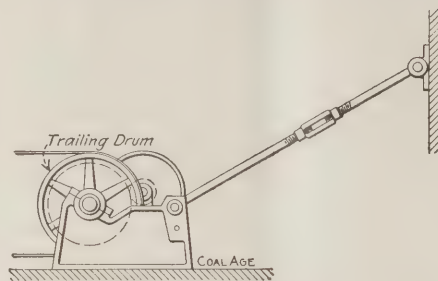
TENSION ARRANGEMENT, SUTCLIFFE CONVEYOR
